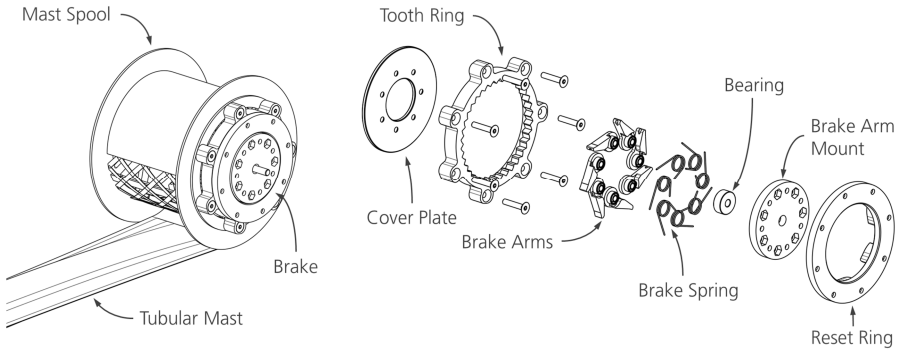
Brake Mechanism attached to the Mast Spool (left) and in exploded state detailing its subcomponents (right).
